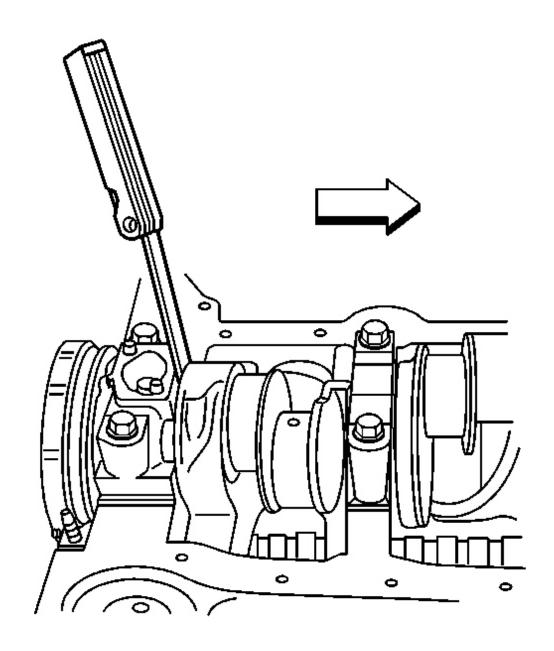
Measuring Crankshaft End Play Courtesy of GENERAL MOTORS CORP.
